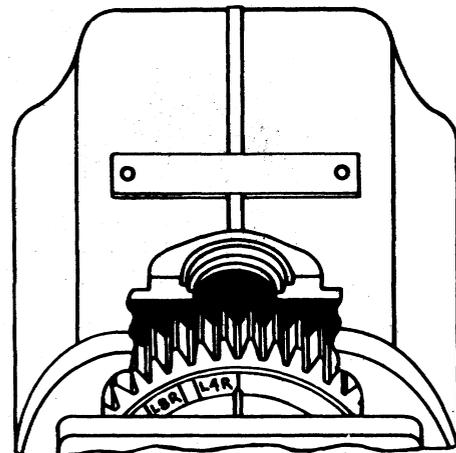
Alignment of Timing Marks on Distributor Gear – 4 Cylinder, Right Hand Rotation
